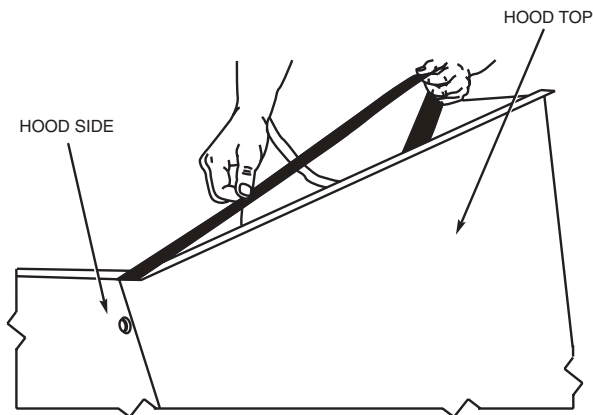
Economizer Hood Assembly (Right Side/Center Economizer Hood Shown)
